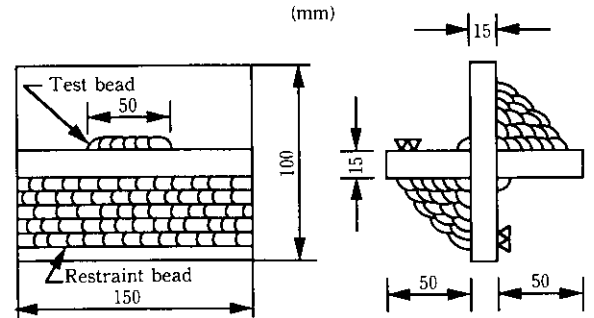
Details of restraint weldment test specimen for dipping test in molten zinc
